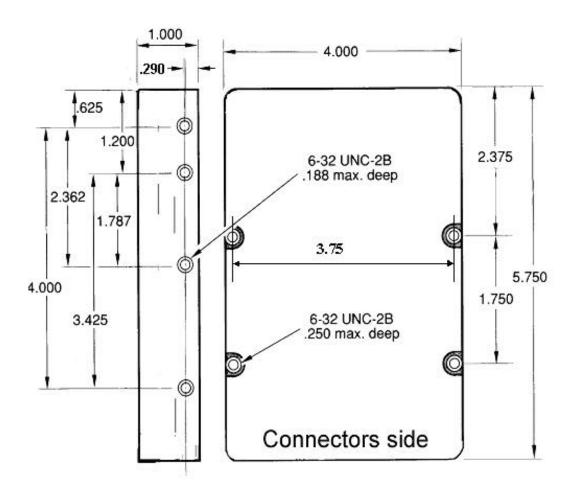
FFD 3.5" SCSI Assembly Dimensions (in mm)
